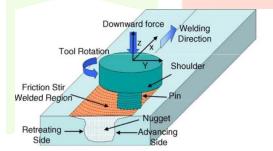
Principle drawing of the FSW process for joints with indication of the main parameters
